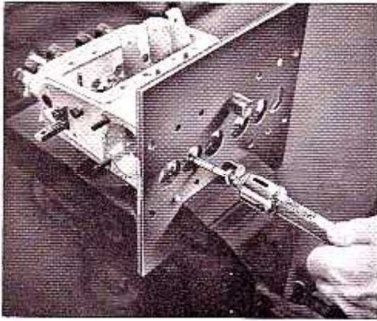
INSERTING PLUNGER AND TAPPET BLOCK USING FORCEPS 7044/859
